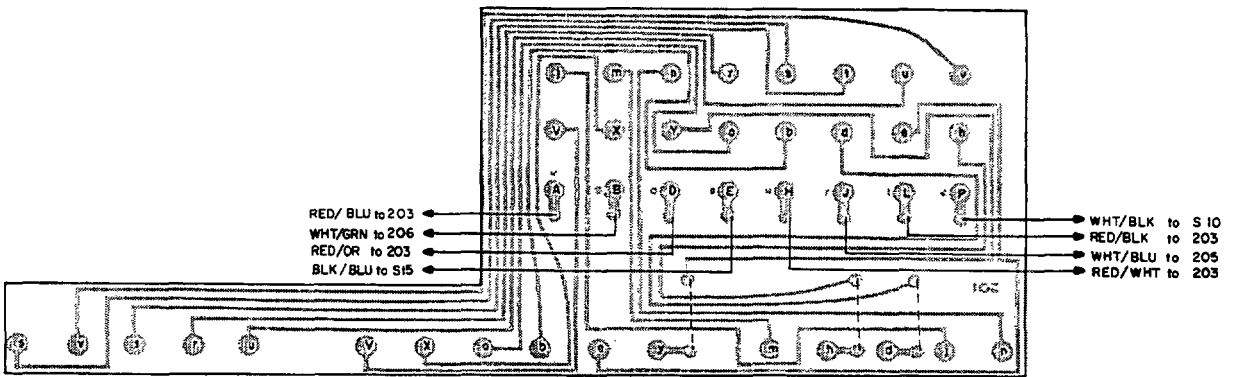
P.C. BOARD ASSEMBLY, BOARD 201, DRAWING
